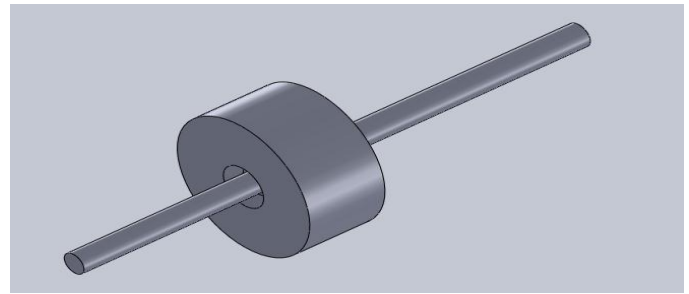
3D CAD model for die and wire assembly for die no.5
